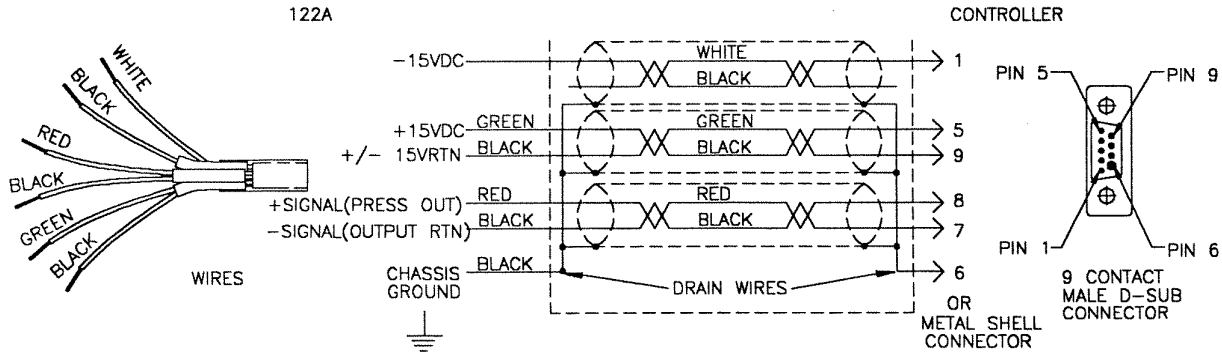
CAPACITANCE MANOMETER CABLE FOR TYPE 122A GAUGE
